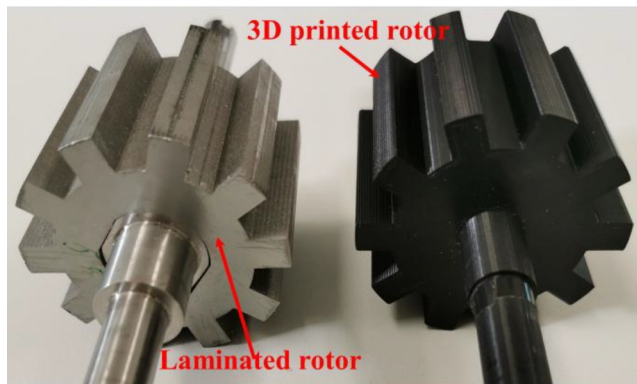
| Laminated iron core rotor and 3D-printed PLA rotor.
